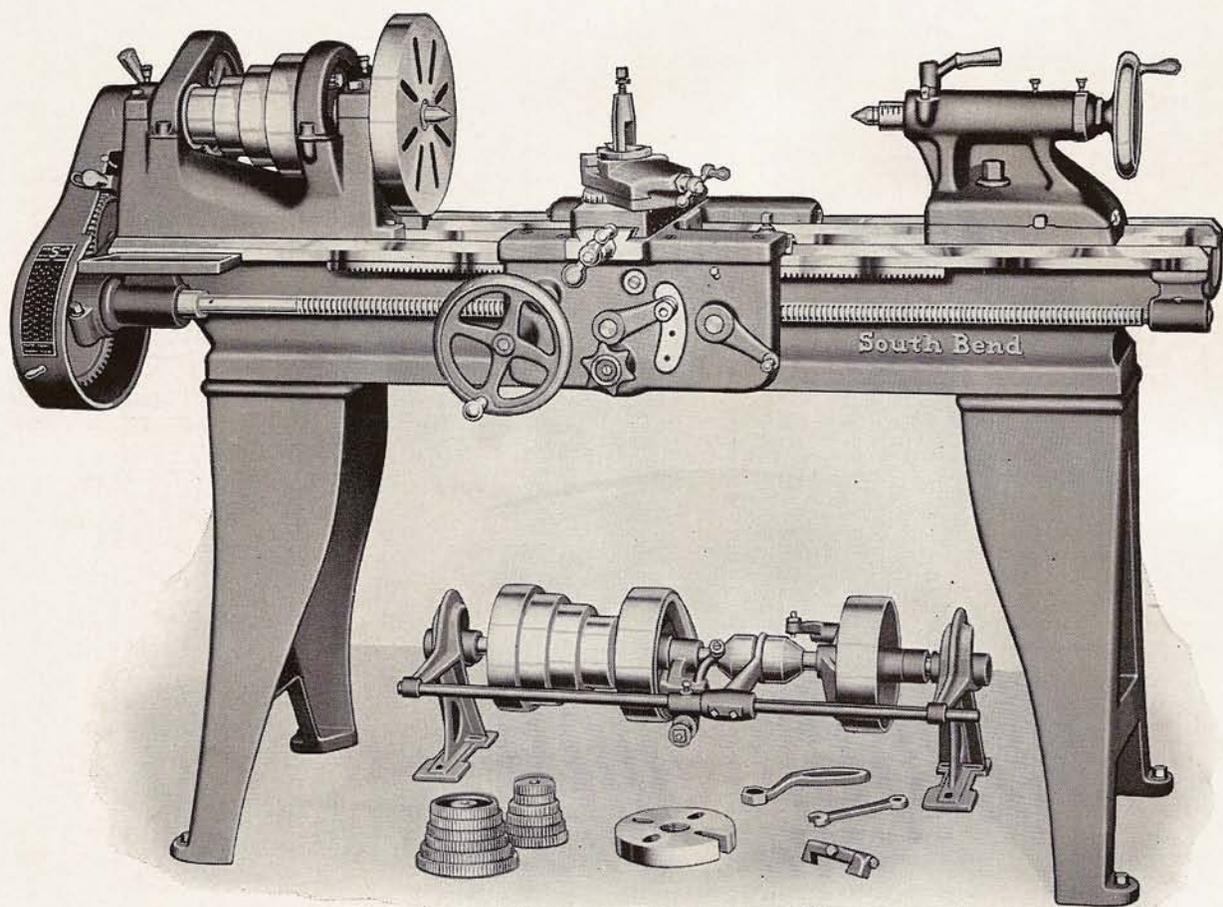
Cat. No. 12-B, 13" x 5' Series "R" Standard Change Gear Countershaft Drive Lathe complete as shown....\$463.00
